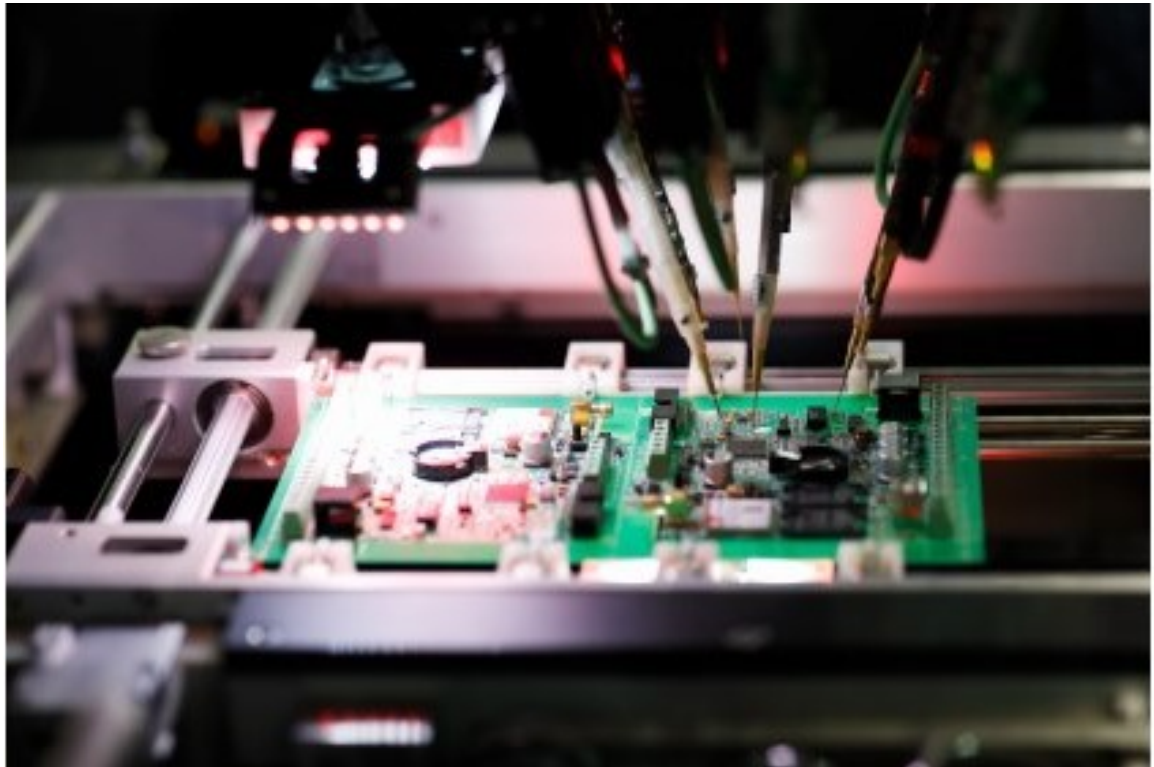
Flying probe tester machine can test multiple points on a circuit board. [9]
